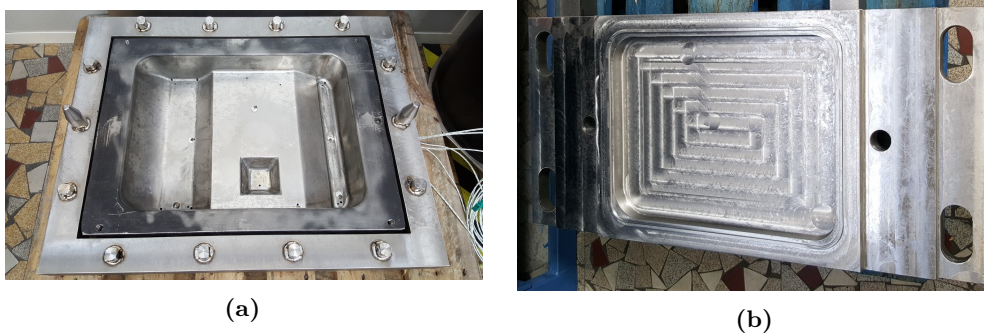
Picture of (a) mold and extraction frame and (b) top mold for SPF forming
